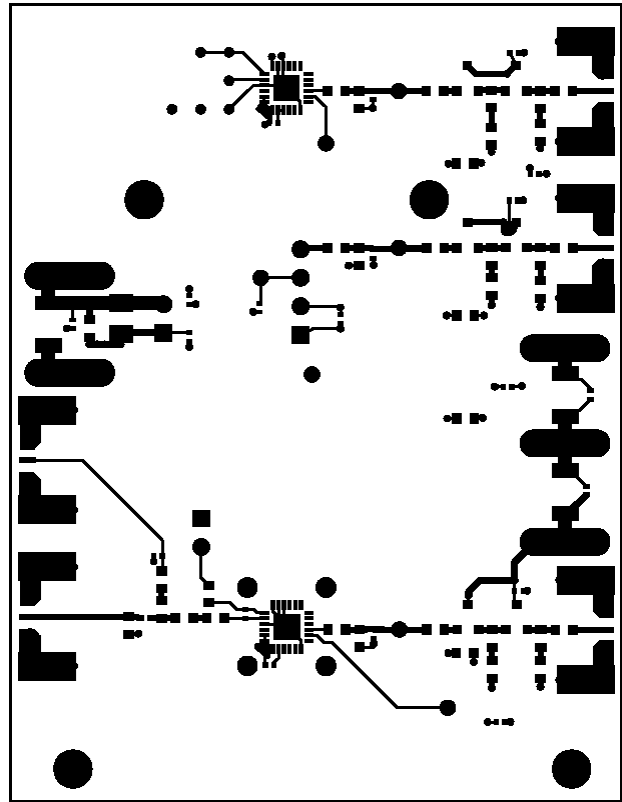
MAX3901 EV Kit PC Board Layout - Solder Side
